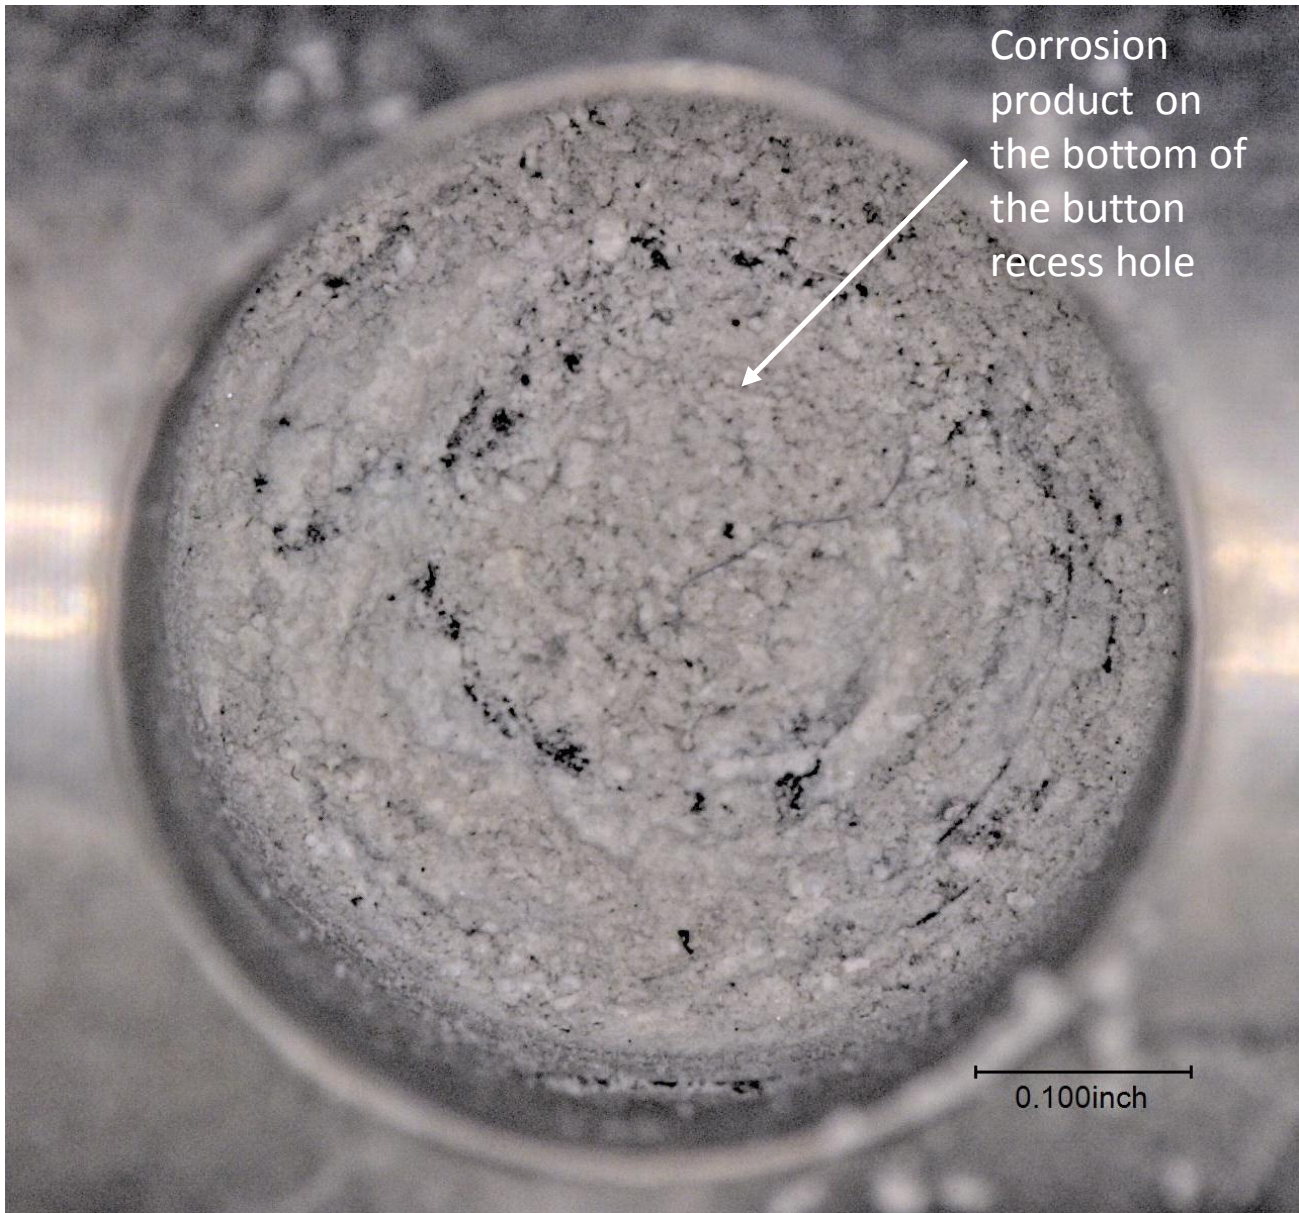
Higher magnification image of the button recess hole and the presence of corrosion product.
